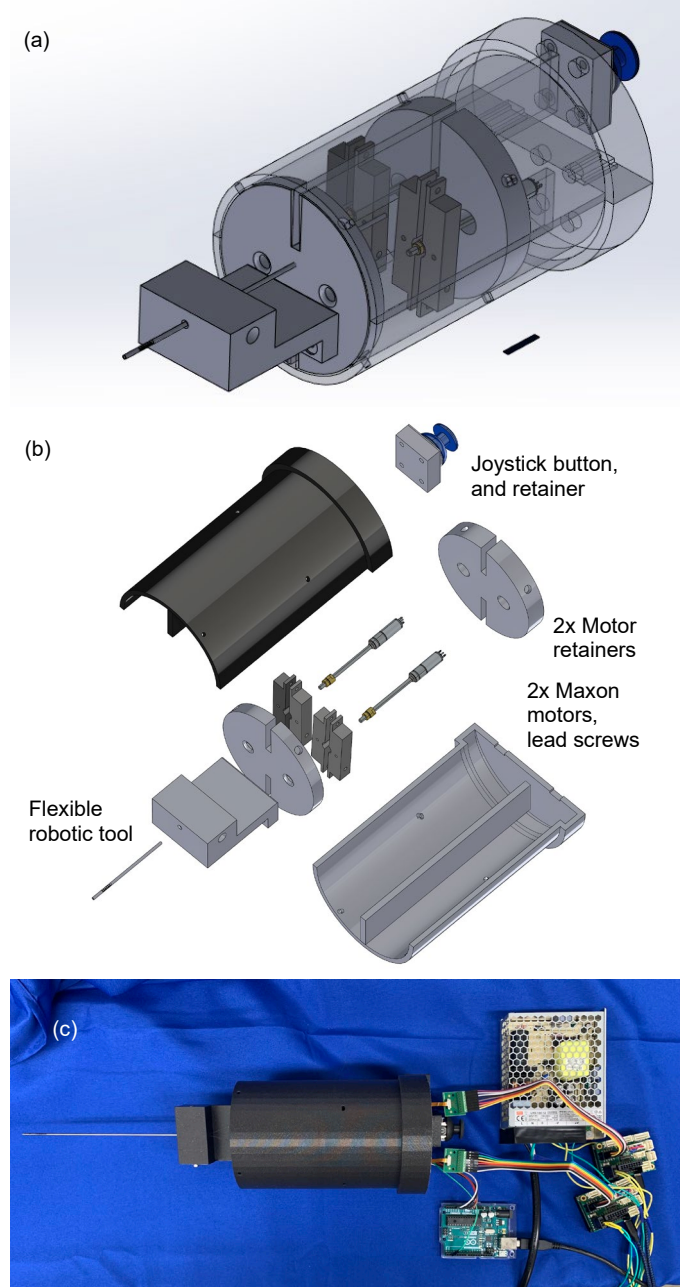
(a) COMPACT ACTUATION DEVICE (20MM SCALE BAR) WITH (b) LABELED PARTS IN EXPLODED VIEW, AND (c) FABRICATED PROTOTYPE.
